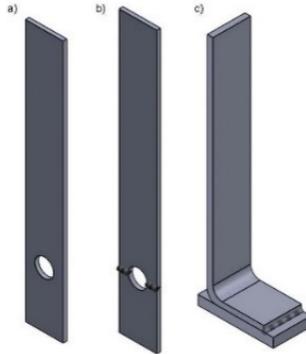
Examples of test pieces used according to the demonstrated method: a) B type – taken from metal sheet, b) PS type – joining two metal strips with butt weld, c) PSP type – joining wheel disk and rim with fillet weld (obtained from wheel rim sized 12x4.25)
